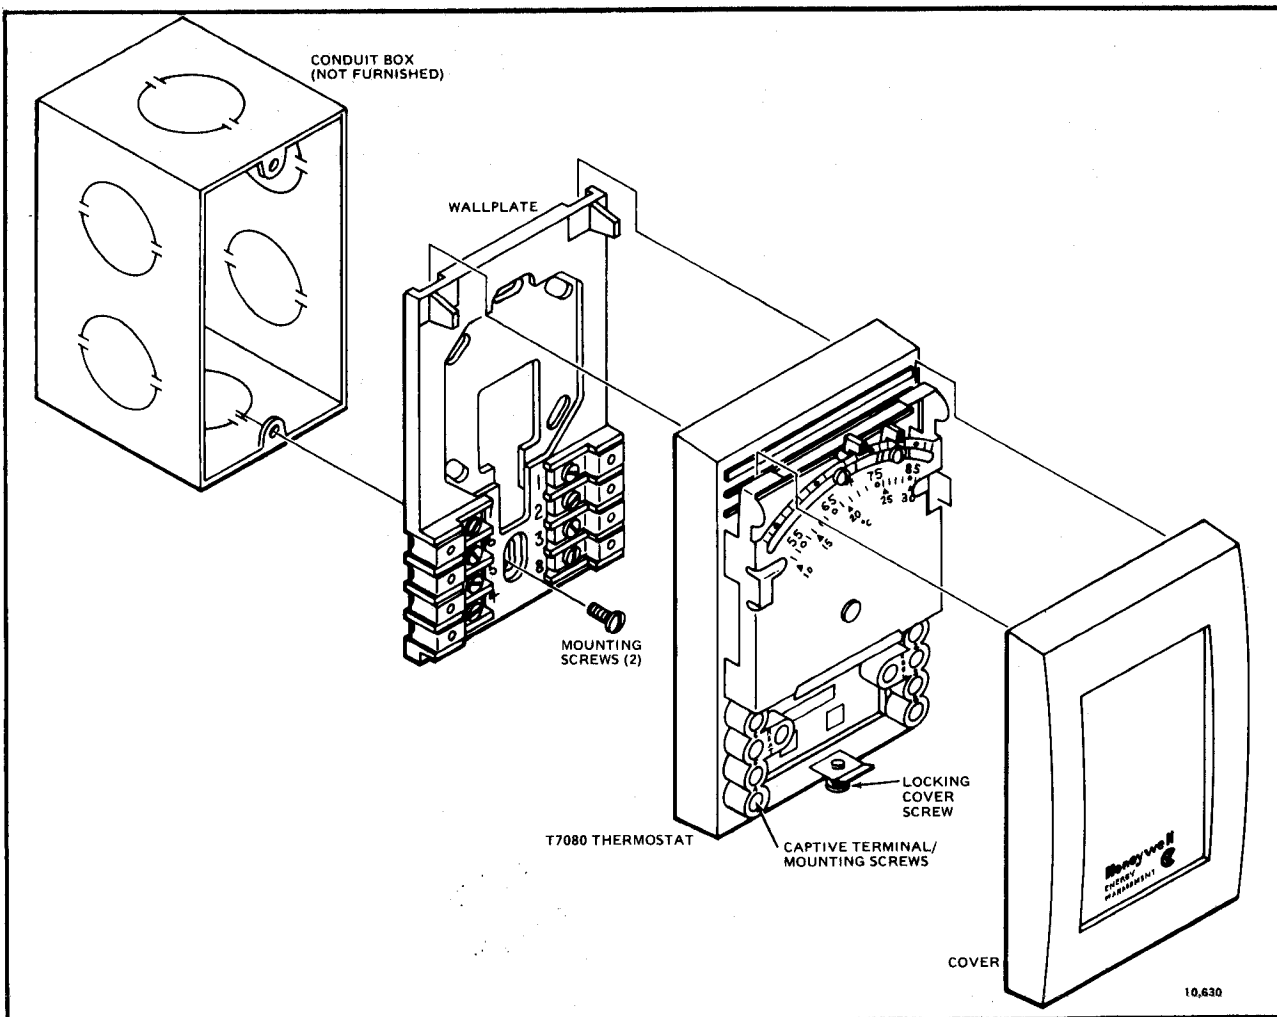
MOUNTING THE T7080 THERMOSTAT ON AN OUTLET BOX.
